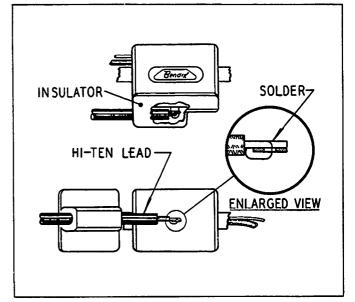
Cable Position for Soldering to Coil High Tension Terminal
